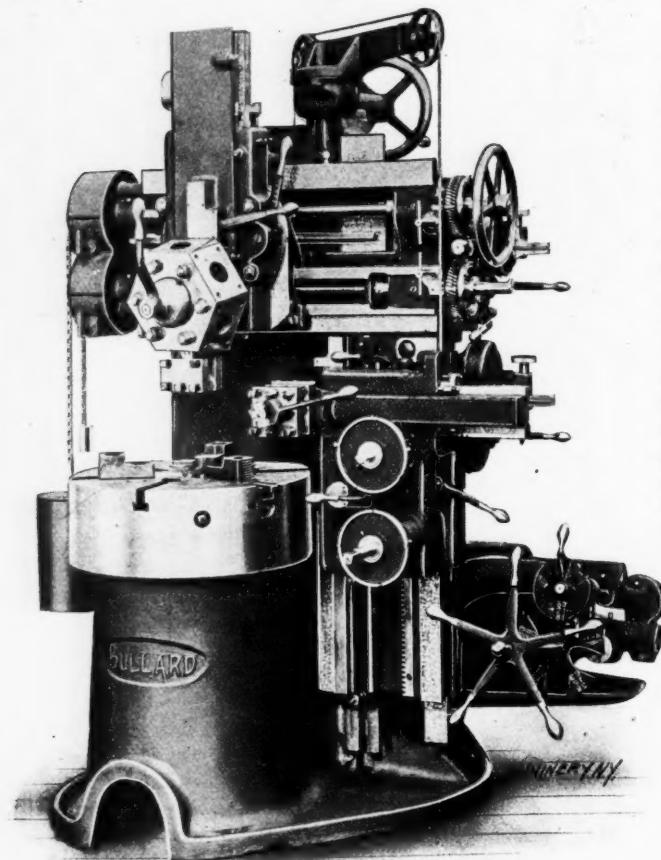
Front View of the Bullard 24-inch Vertical Turret Lathe.
